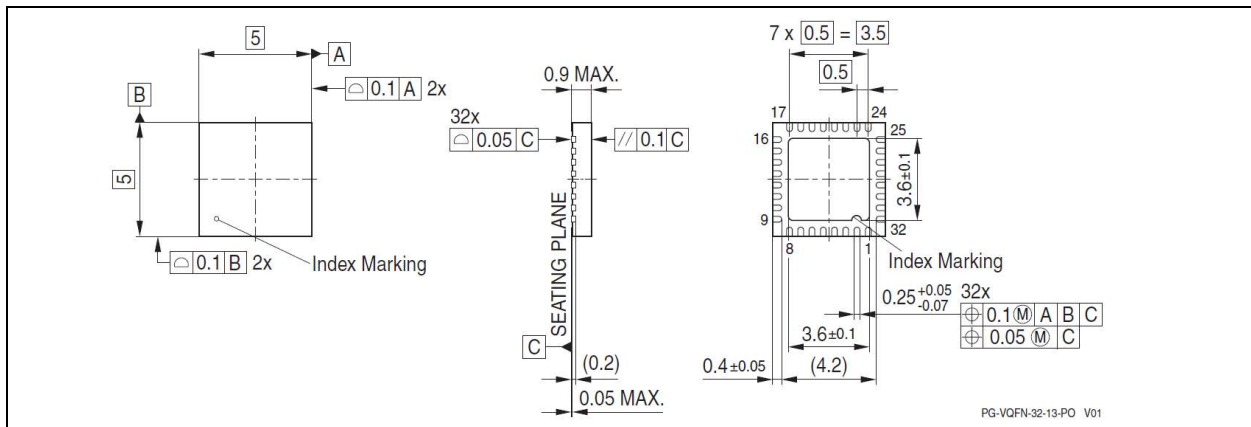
Target Package Dimensions PG-VQFN-32-13 (6ED2742S01Q)
